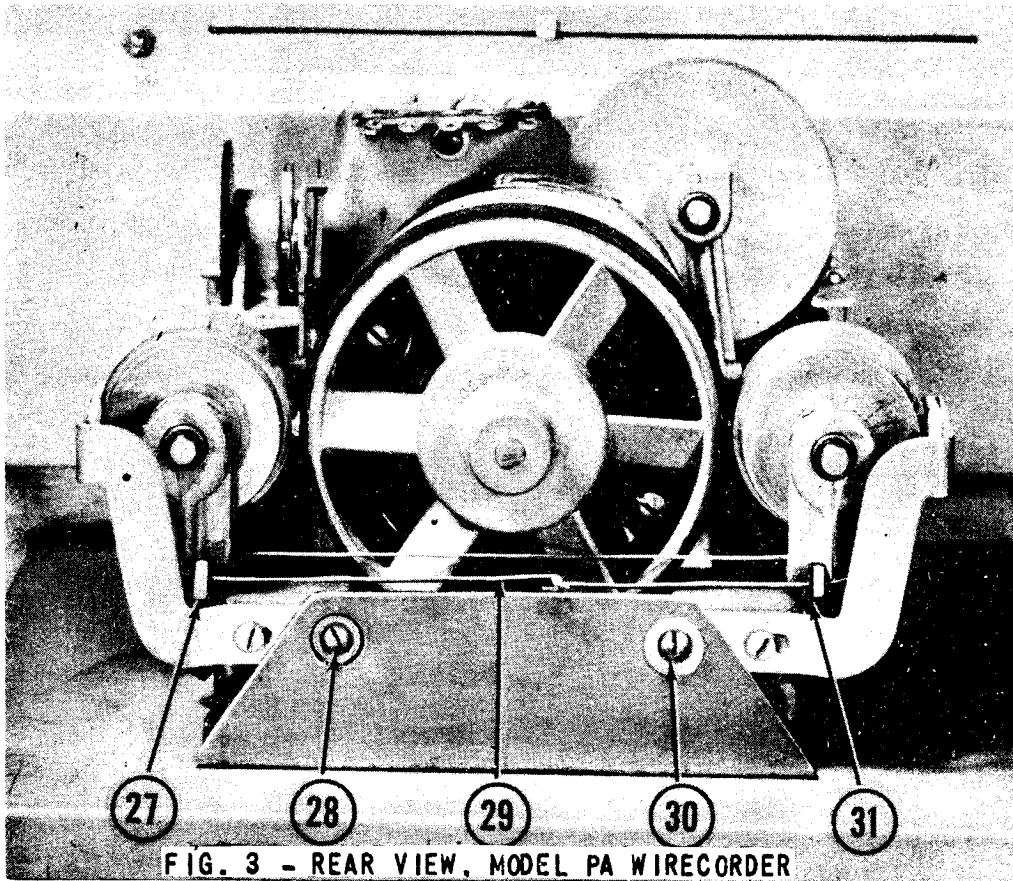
REAR VIEW, MODEL PA WIRECORDER
